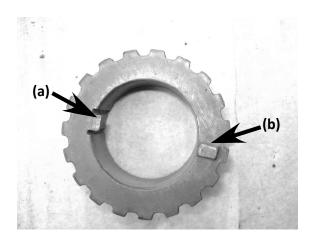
Front of crankshaft pulley boss. Arrow (a) points to ridge that locks onto groove in crankshaft. Arrow (b) is the knob where front crankshaft shim and crankshaft pulley locks onto.
